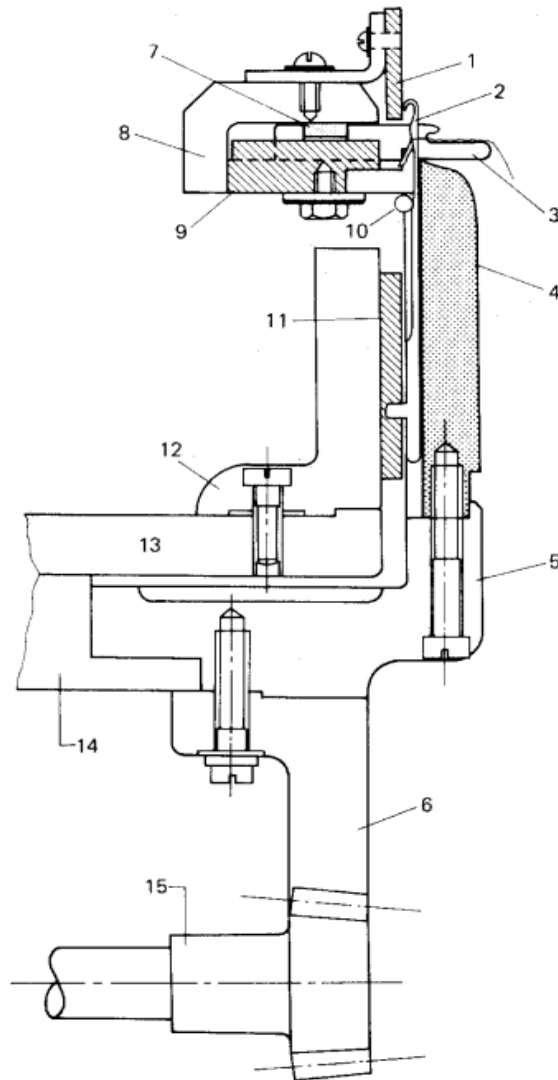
Cross-section of knitting head of a single jersey machine.
